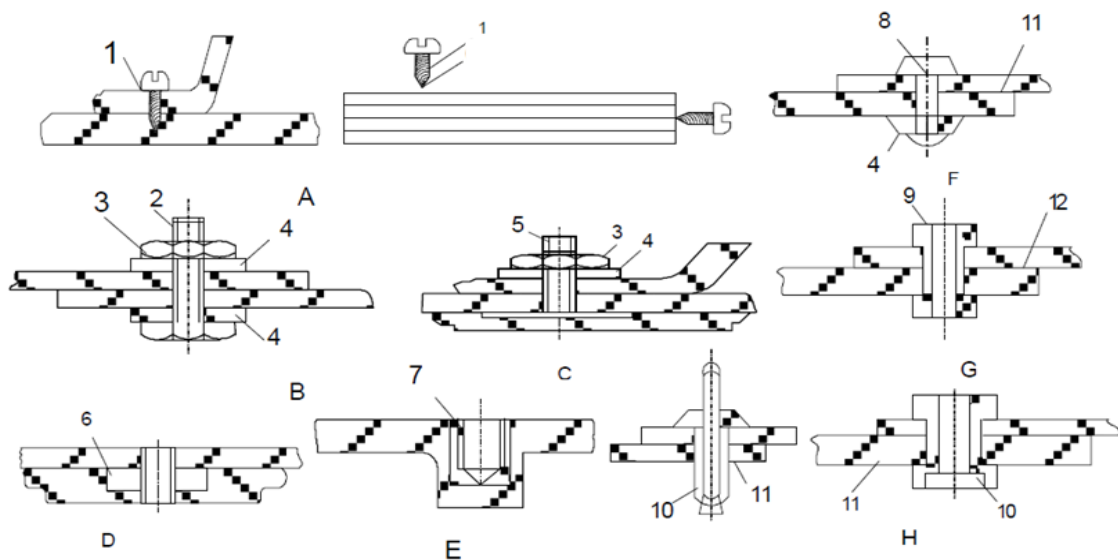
Systems for screwed and riveted butt: A - clamping grub screw (1); B - the clamping screw (2), the ring (4) and the nut (3); C - clamping with threaded bolt (5); D - Built-threaded mounting plate (6); E - expandable fixing nut (7); F - round head rivet fasteners (8); G - rivet fastening pipe (9), H - pop rivet fasteners (10); 11 - metal; 12 - plastic
